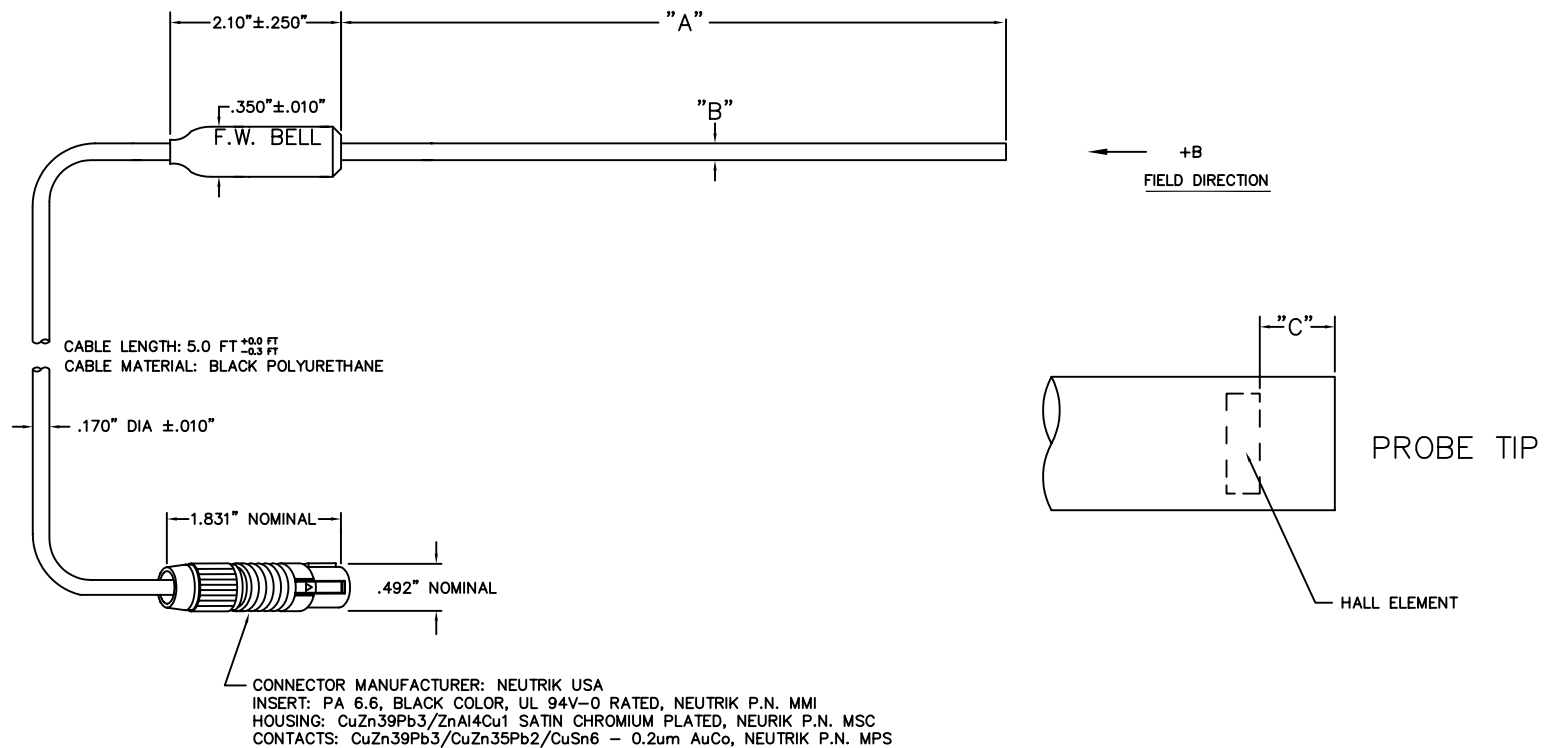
AXIAL PROBES (REF. ⑧ THRU ⑪)
